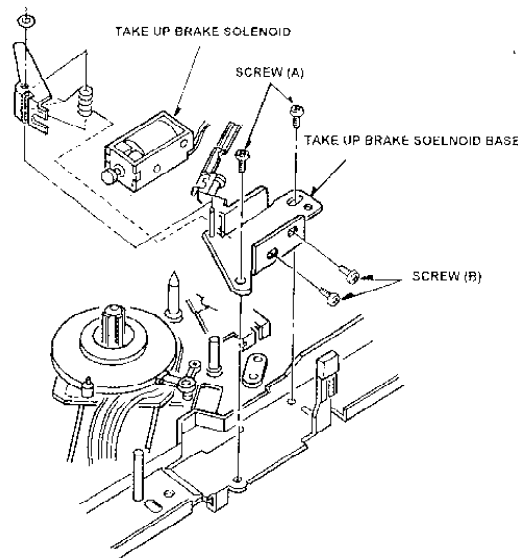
Removal of Take Up Brake Solrnoide
